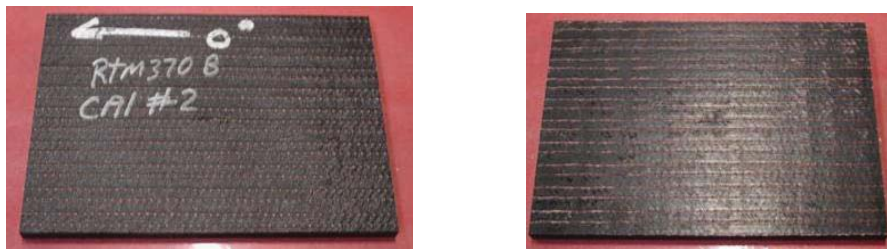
Impacted RTM370 Specimen, (Left) Top side, and (Right) Bottom side
